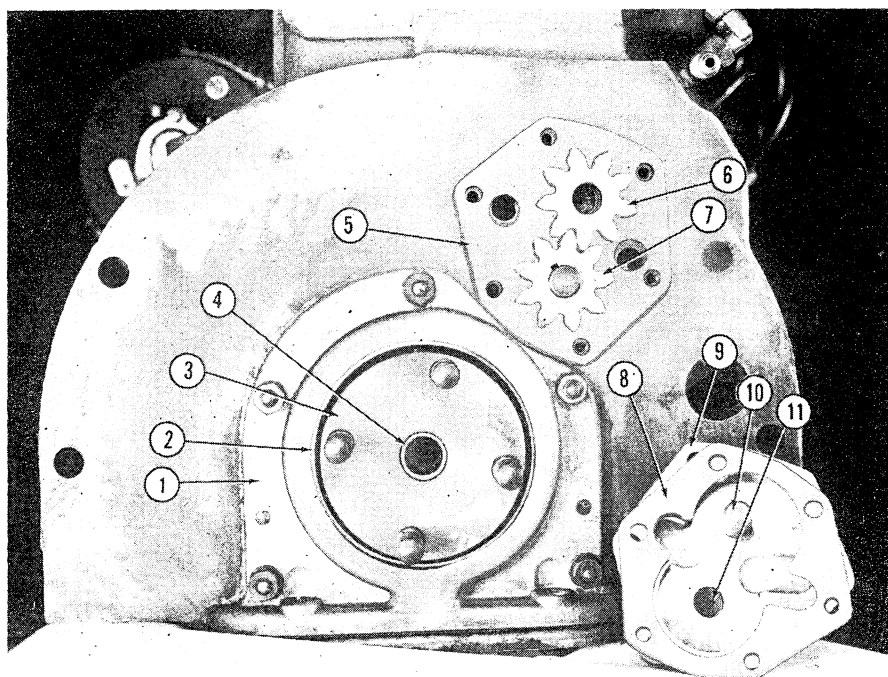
Continental N62 oil pump assembly and crankshaft rear oil seal. Repairs on these units require removal of clutch and flywheel.
